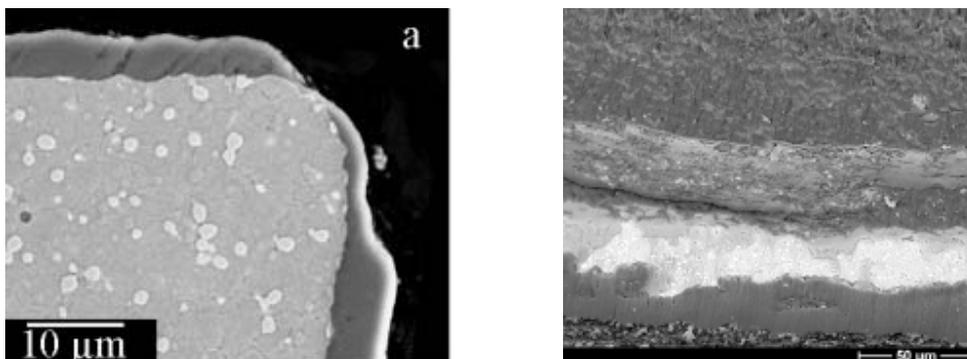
An unused tooth of a hob in a cross-section showing coating damage at the cutting edge (left) and a cutting edge after use with extensive wear at the edge, initiated as edge chippings, and crater wear at the rake face (right).
